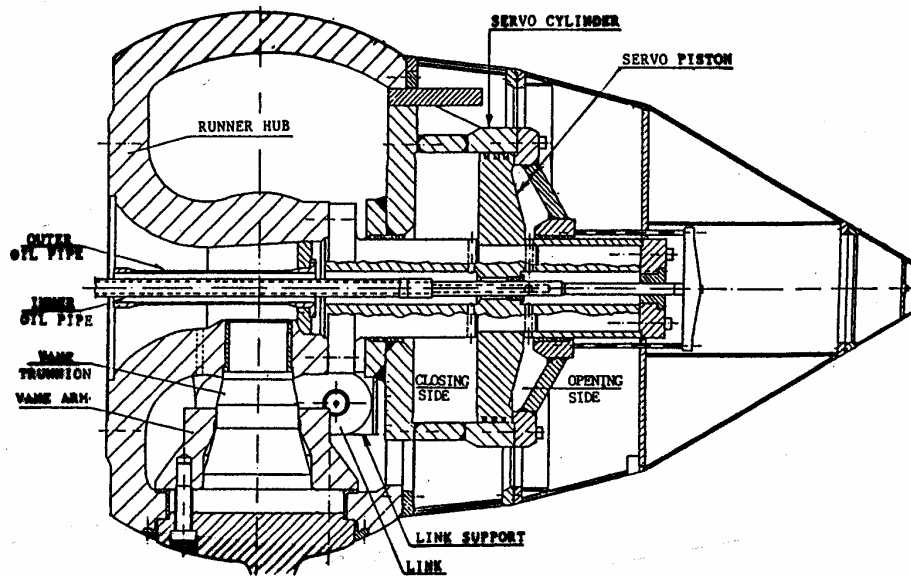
Runner hub (Courtesy of Kvaerner Brug)
